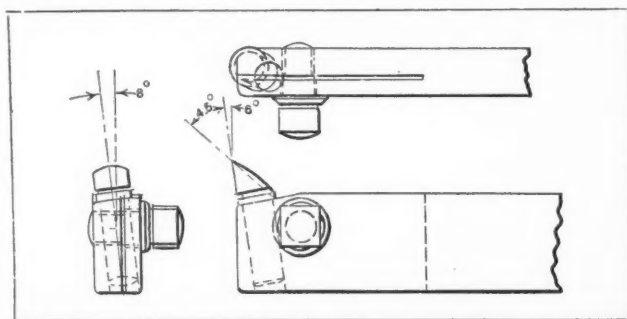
Planer and Shaper Tool for Machining Aluminum
